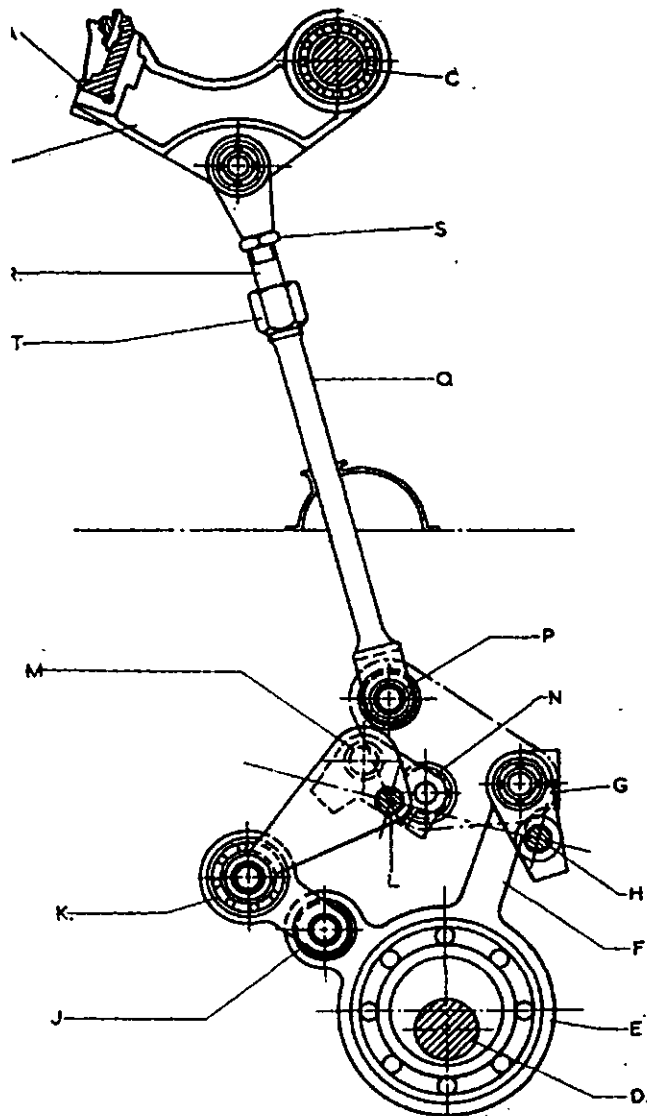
Needle Bar Mechanism; Eccentric Drive. After Raz (1987)
